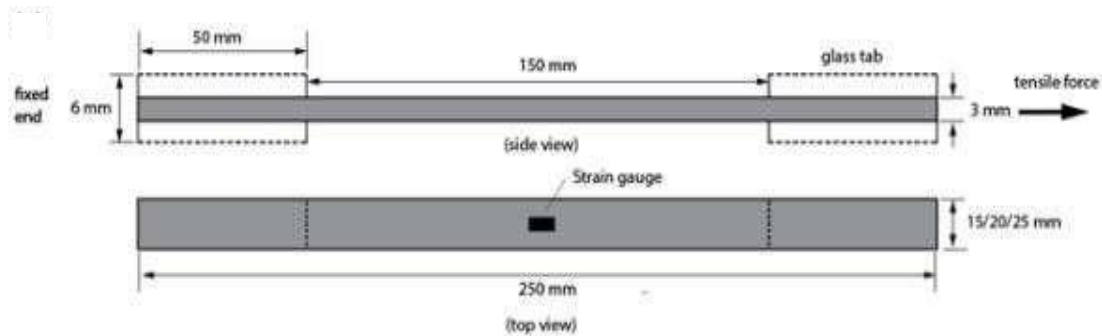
Tensile test specimen ASTM standard D-3039 dimension
